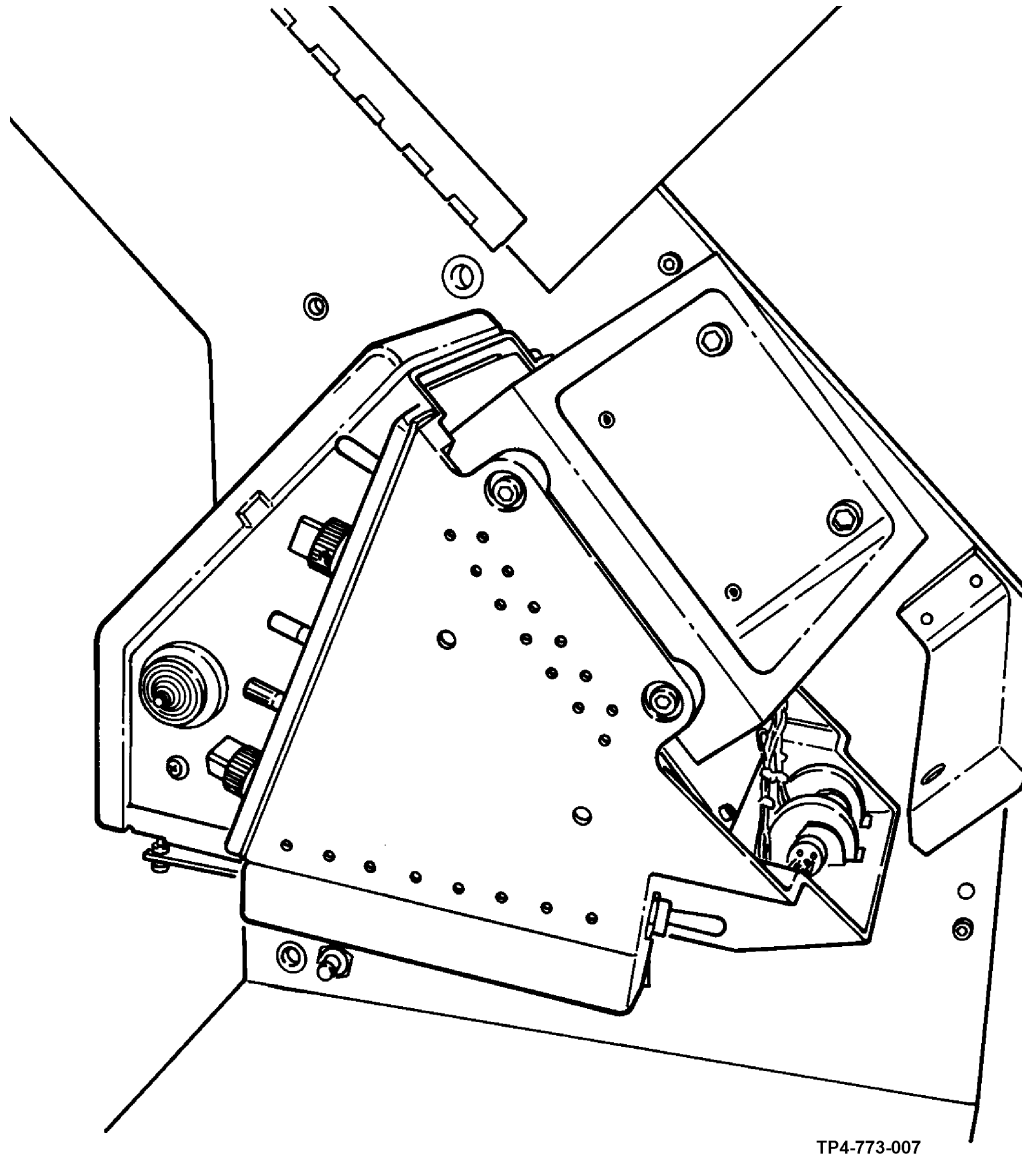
Control Panel Assembly Installed in Electrical Test and Alignment Position
